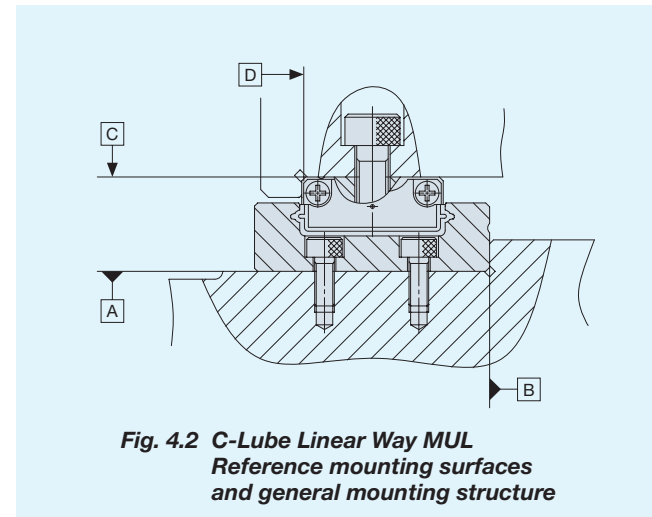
C-Lube Linear Way MUL Reference mounting surfaces and general mounting structure
